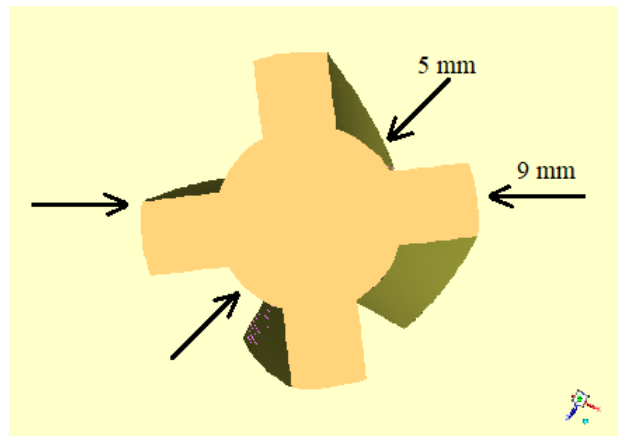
View of the grooves placed in the inner part of the pipe (researcher’s findings)
